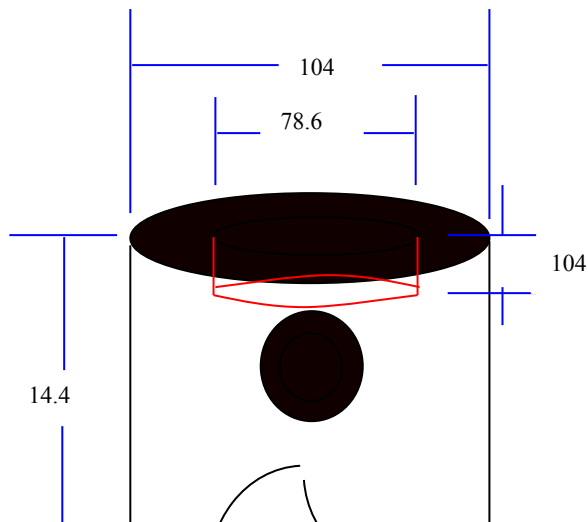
Dimension of CNG converted Piston (CR=11)
